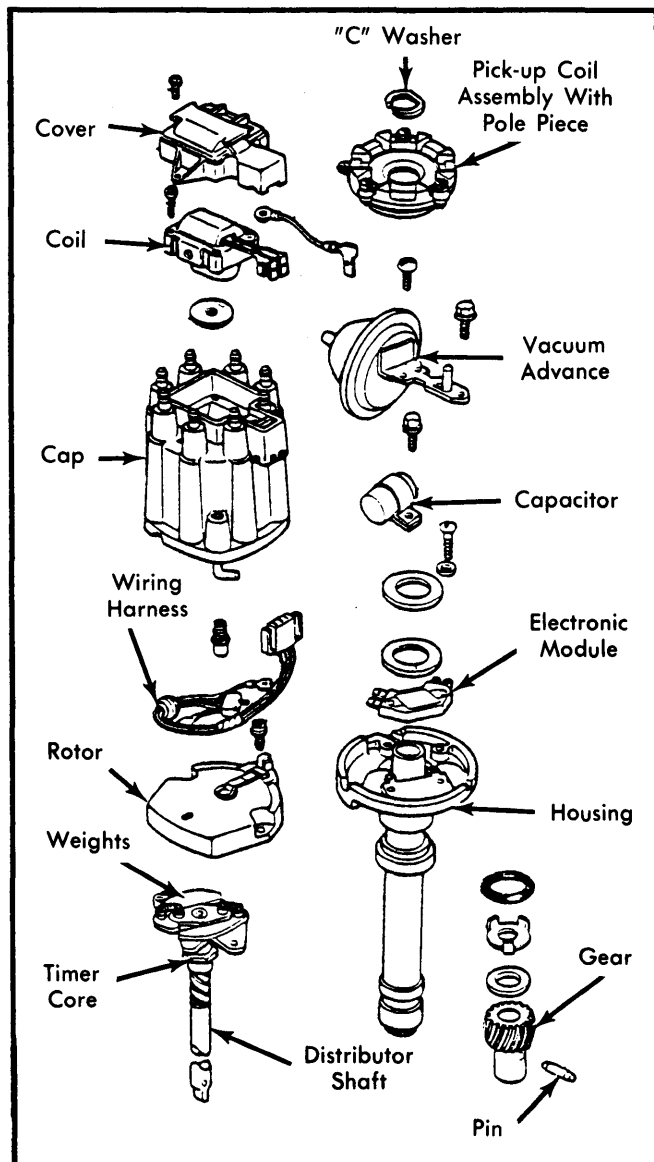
Exploded View of Integral Coil Type High Energy Ignition Distributor
